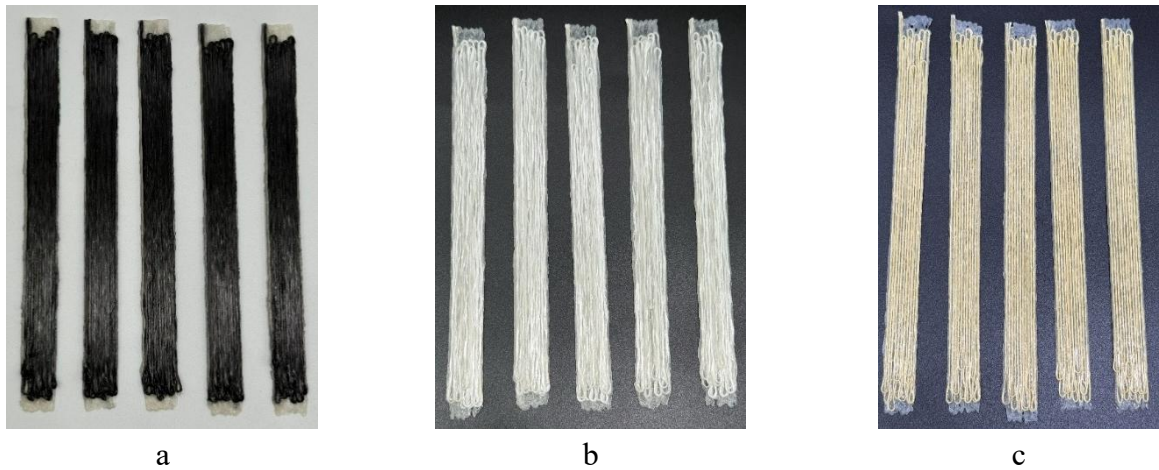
Printed composite tensile specimens: a – PHA/CF, b – PHA/GF, c – PHA/AF
